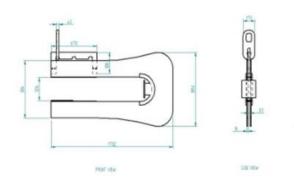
2D Drawing of Leveling Pipe Lifter
